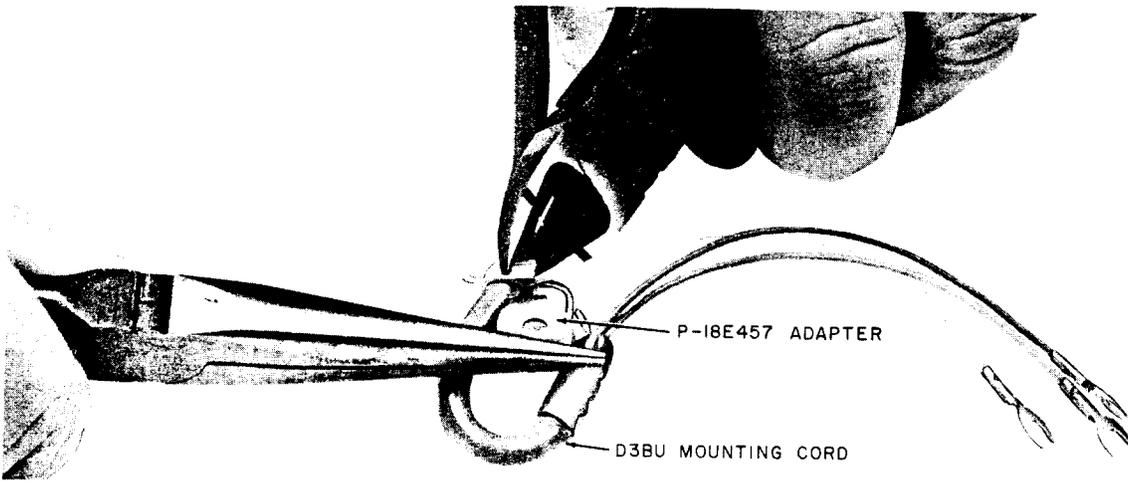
Removing Adapter From D3BU or D4BP Mounting Cord
